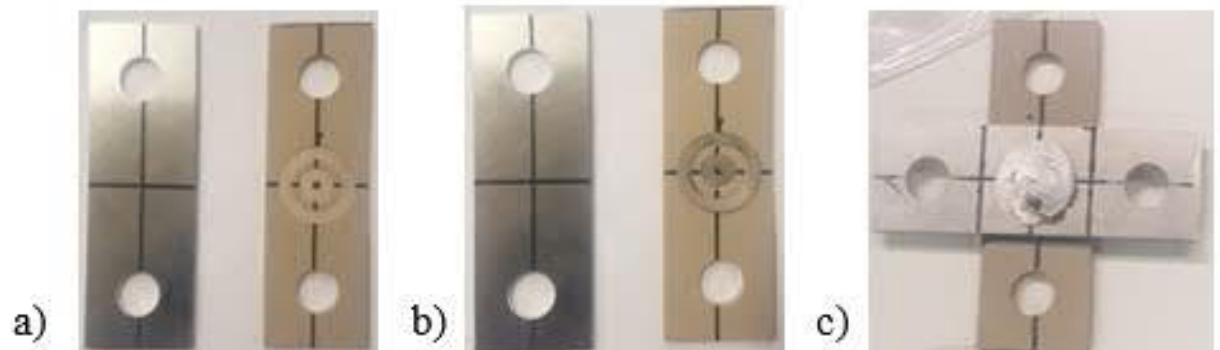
a) Samples to be welded; b) Positioning of the extrusion die; c) Final sample
